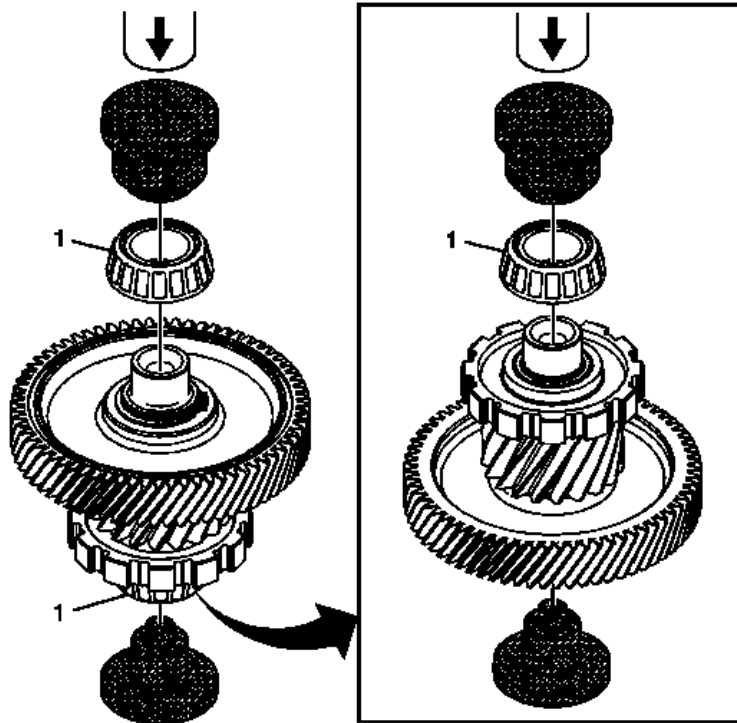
Identifying Front Differential Drive Pinion Gear Bearing
